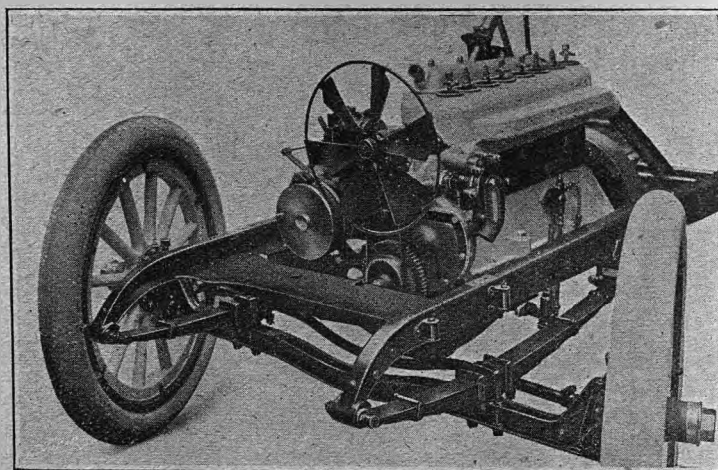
Three-quarter front view of the 20-25 h.p. Studebaker chassis, with the radiator removed.
